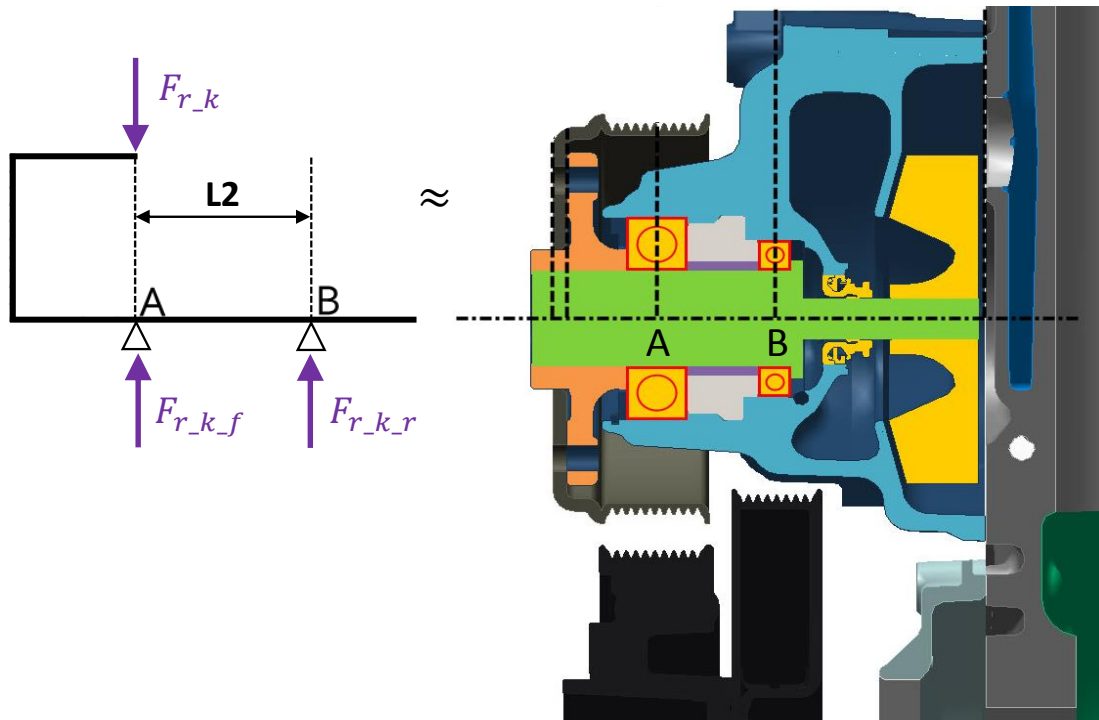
Water pump and fan shaft with a bearing (B) out of the belt working plan.
